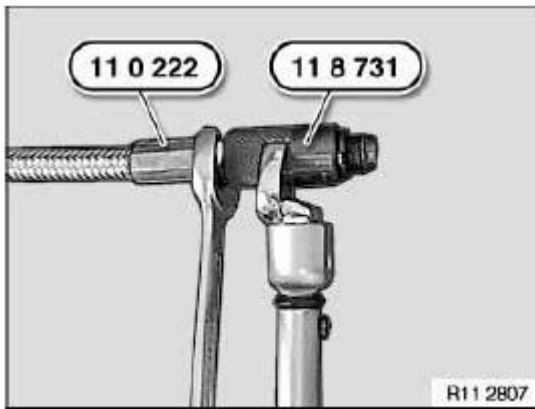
Inserting Special Tool 11 0 222 Into Special Tool 11 8 731
